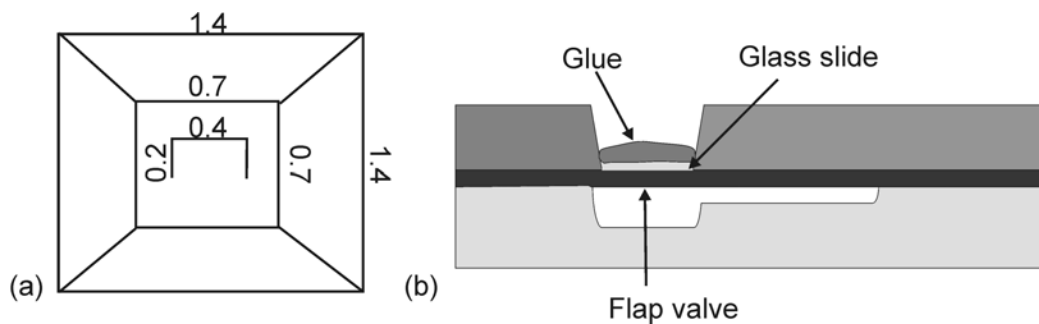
(a) Top view of the flap valve at the bottom side of each inlet hole (the dimensions are given in mm) and (b) cross-section of the inlet hole.
